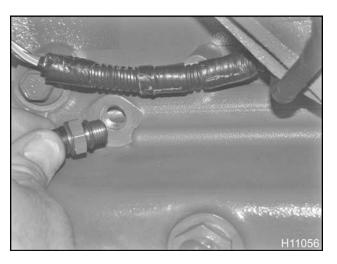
Removing the fuel valve assembly (air bleed and pressure test port)
